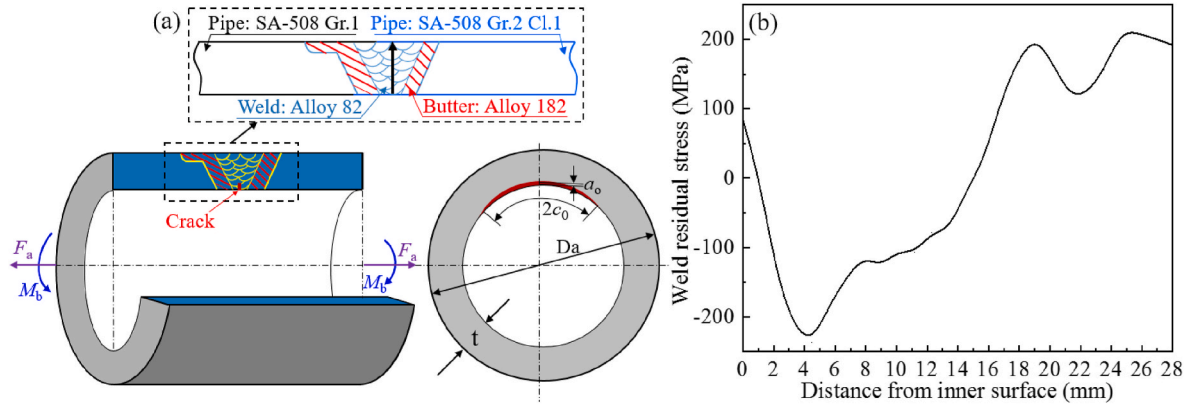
Schematic illustration of straight pipe with a DMW weld.
